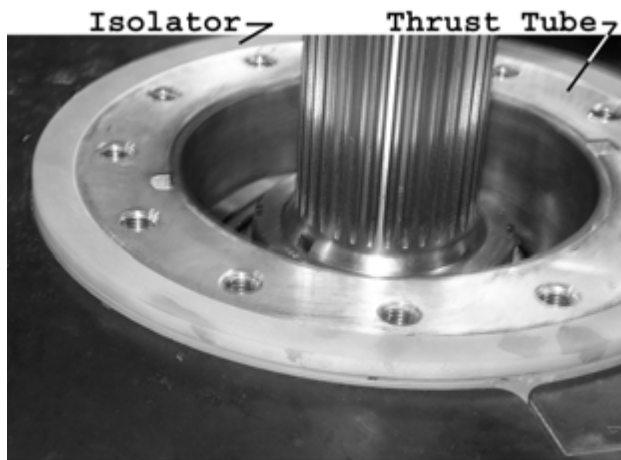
Raise the Ball from the Thrust Tube, Remove O-rings, Shims and Isolator
